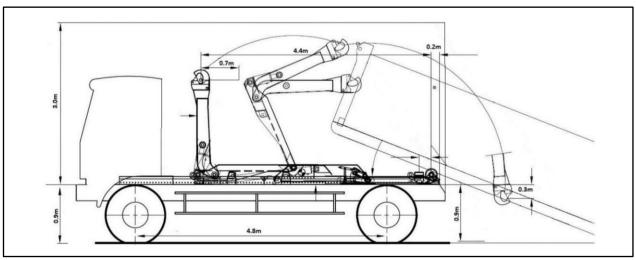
Typical Hook Lift Waste Collection Vehicle Configuration
